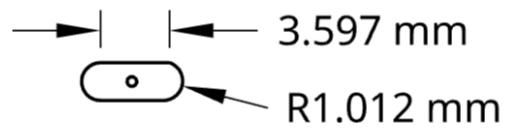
CAD Drawing of Top View of Case with Dimensions
